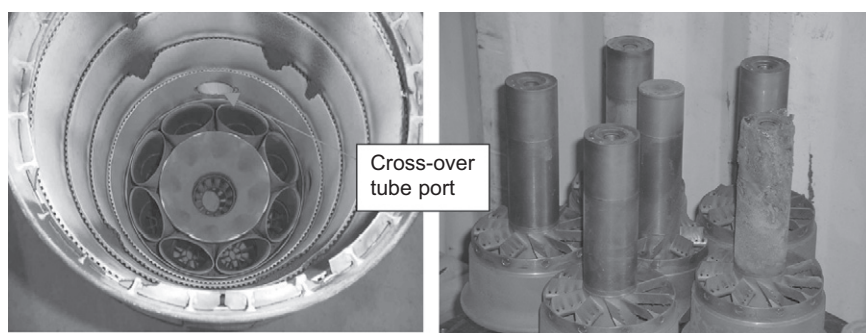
Damage to DLN combustor liners and fuel nozzles.
